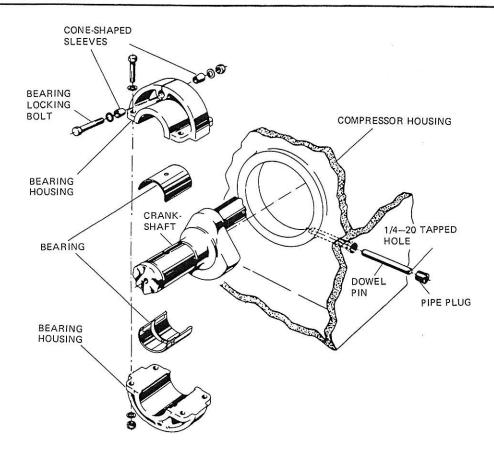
CENTER MAIN BEARING – 12 & 16 CYLINDER COMPRESSORS
